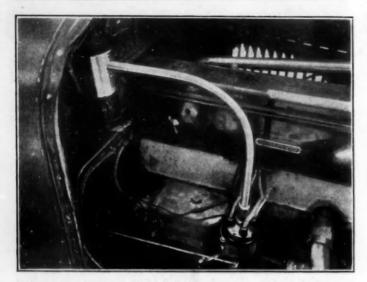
General View of an Installation of the Lock Illustrated in Fig. 6 The Coil-Cover, the Armored Tube and the Special Distributor-Cap Are Shown Located under the Engine Hood
